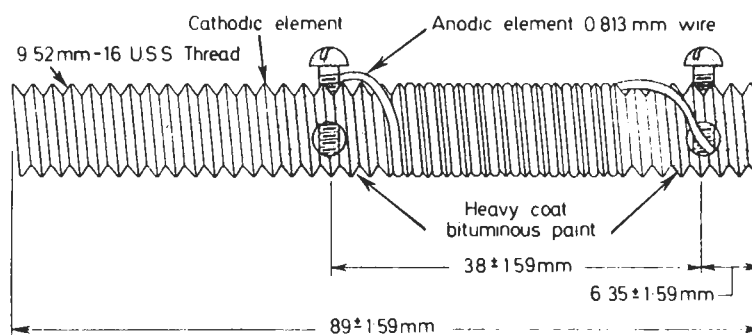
Bolt and wire type atmospheric galvanic couple test specimen
